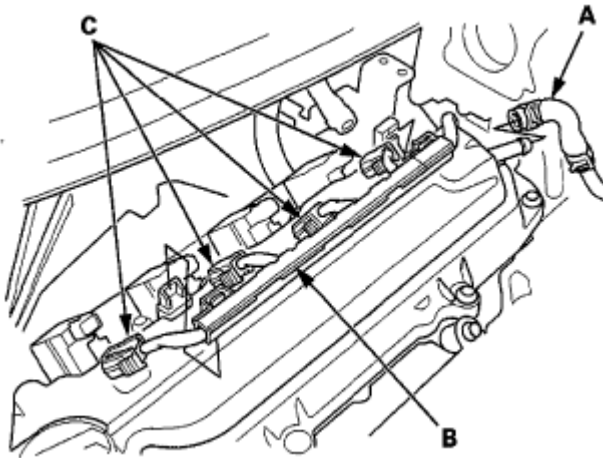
Locating Breather Hose, Harness Holder And Ignition Coil Connectors
